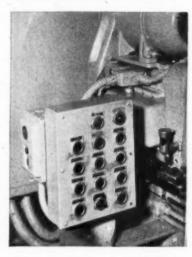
Complete control of each spindle in the "octopus" operation is provided by this control box. There is an individual control on each spindle and in addition provision for all-over control of the machine through the use of the "emergency stop", "emergency return" and "cycle" switches.
